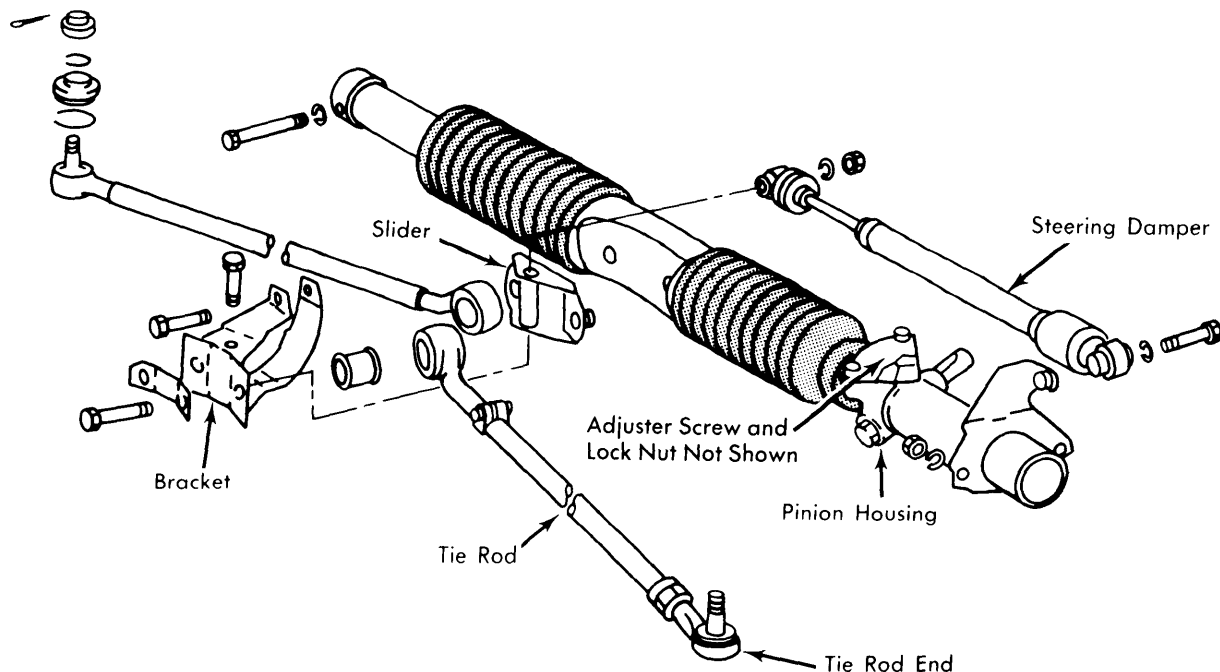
Volkswagen Dasher Rack and Pinion Assembly
